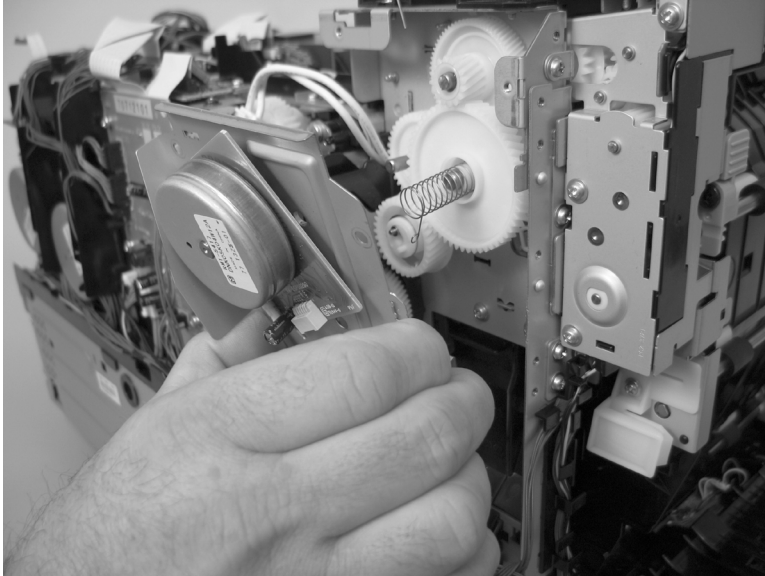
Remove the fuser-motor assembly (5 of 6)
